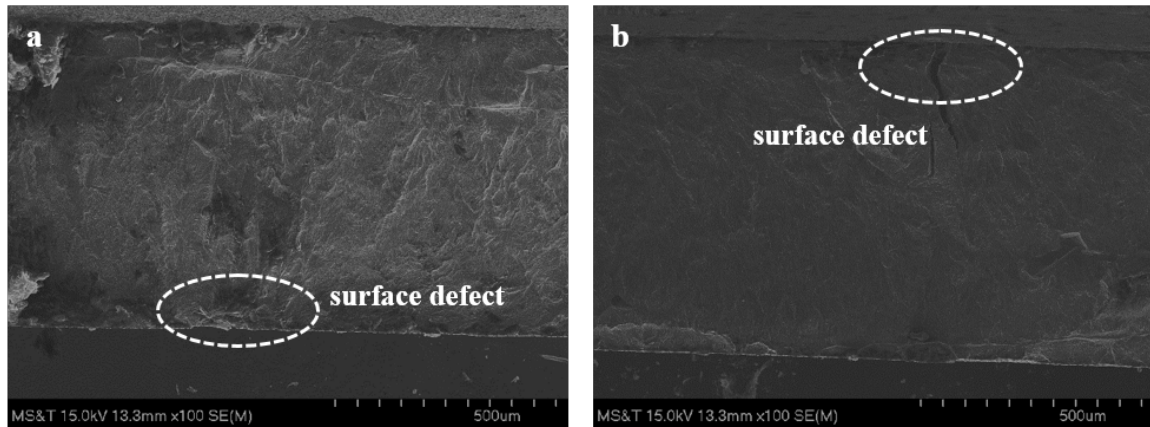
SEM images of the fracture surfaces with possible crack initiation sites of the specimens fabricated by the optimized parameters.
